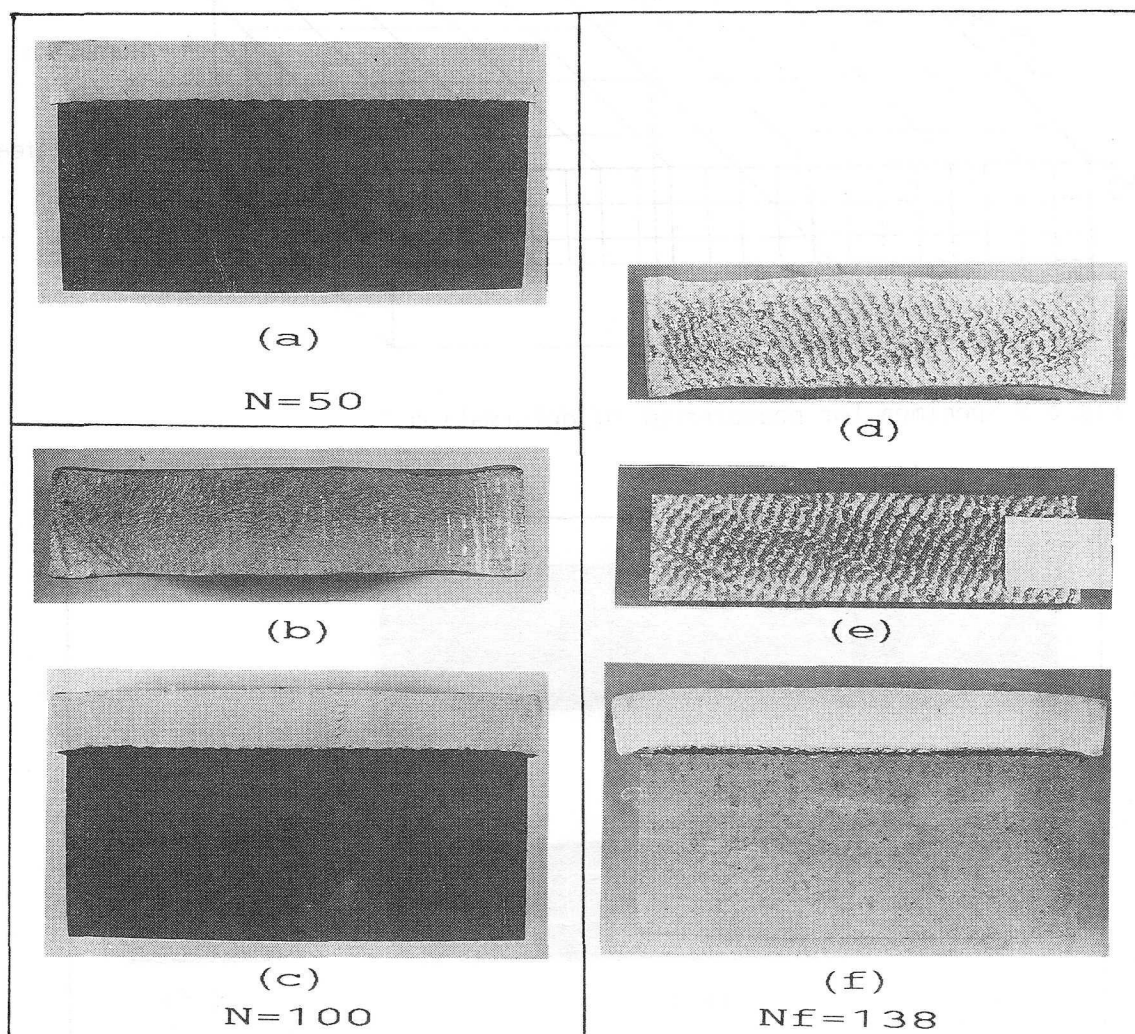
Deformation of aluminium explosive clad steel after thermal cycling (500°C)[(a), (c), (f) longitudinal side; (b) aluminium surface; (d) failure surface(aluminium); (e) failure surface(carbon steel)]
